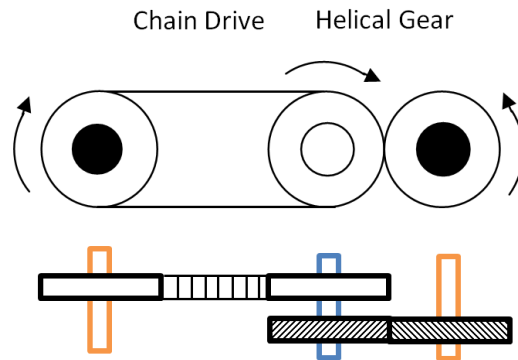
Interaction between chain and gear components. The top and side views are shown respectively. The orange shafts designate the compressor and expander and the blue is an idler shaft.
